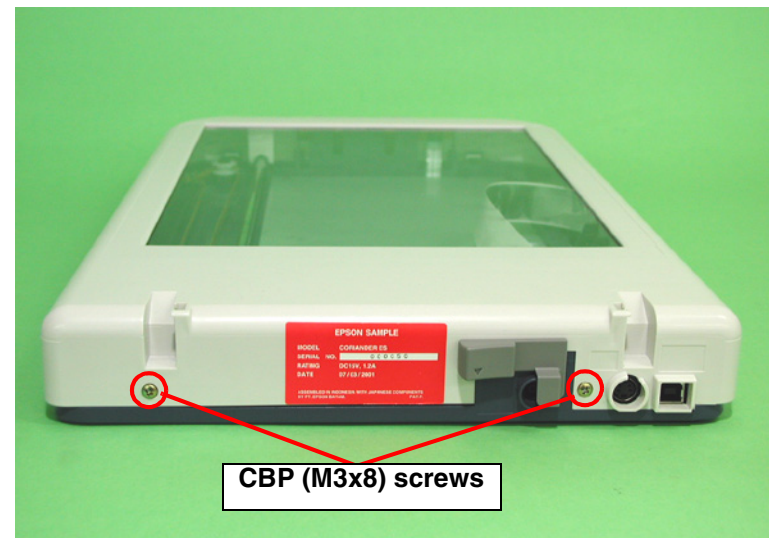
Upper Cover Removal - Remove Rear Screws
